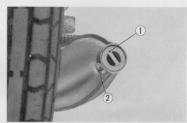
Removing diffuser pipe 1 Diffuser pipe (2) 6×8 hex bolt
